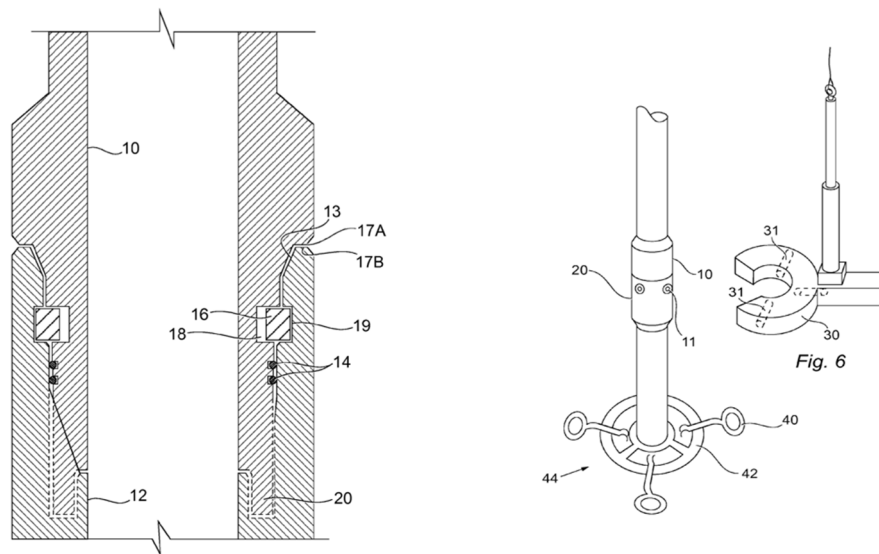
Non-threaded tool joint connection (left) and assembly process (right) by Herrera [29].
